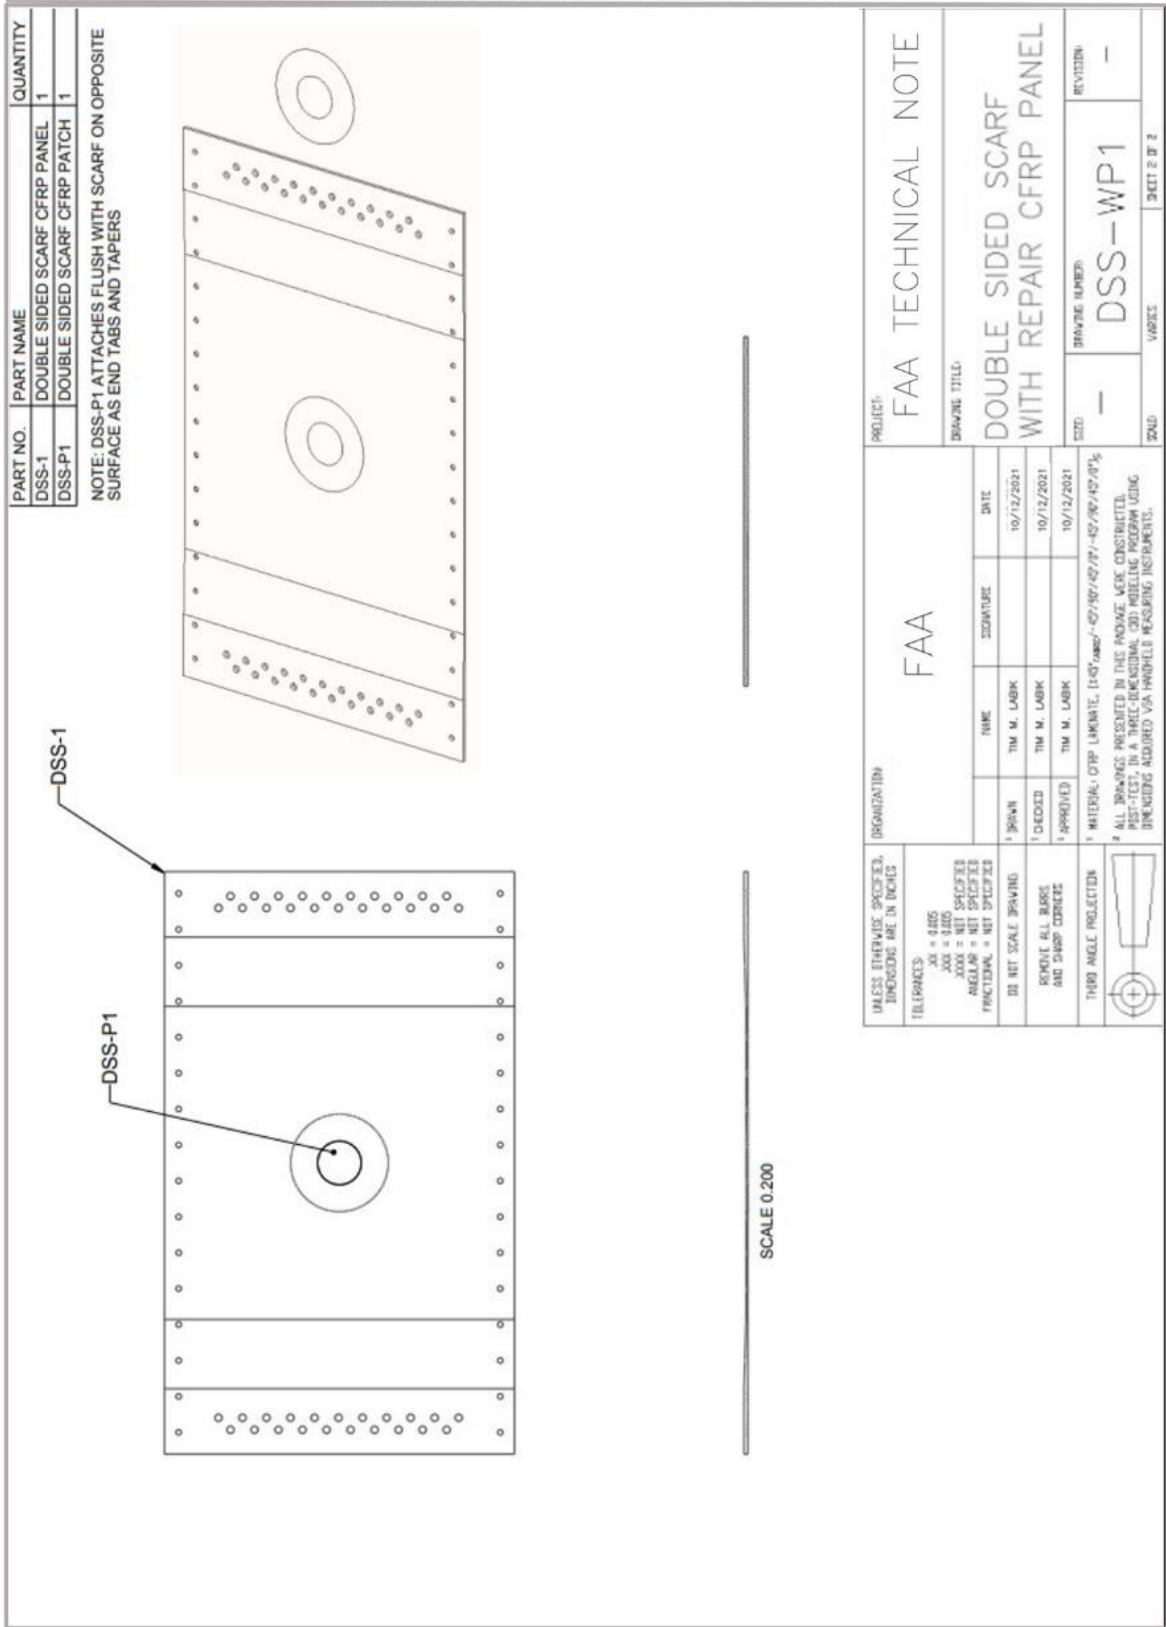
Assembly drawing of the double-sided scarf panel with repair
